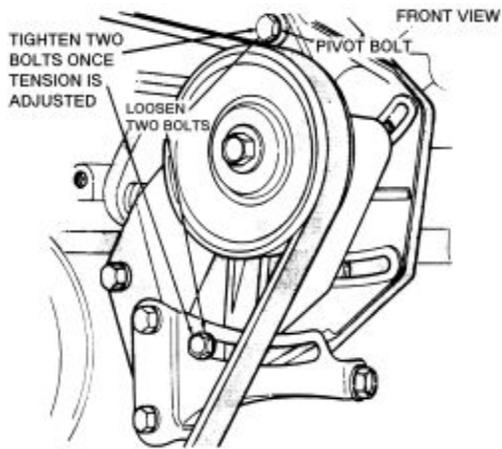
Adjustment points on the 2.5L engine (front view)
